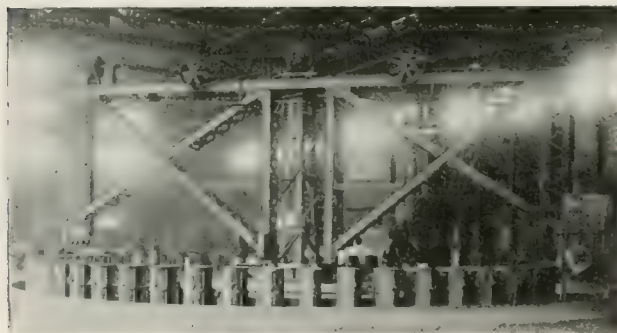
PIPE CASTING MACHINE DRIVEN BY A 30 HORSE-POWER MOTOR
